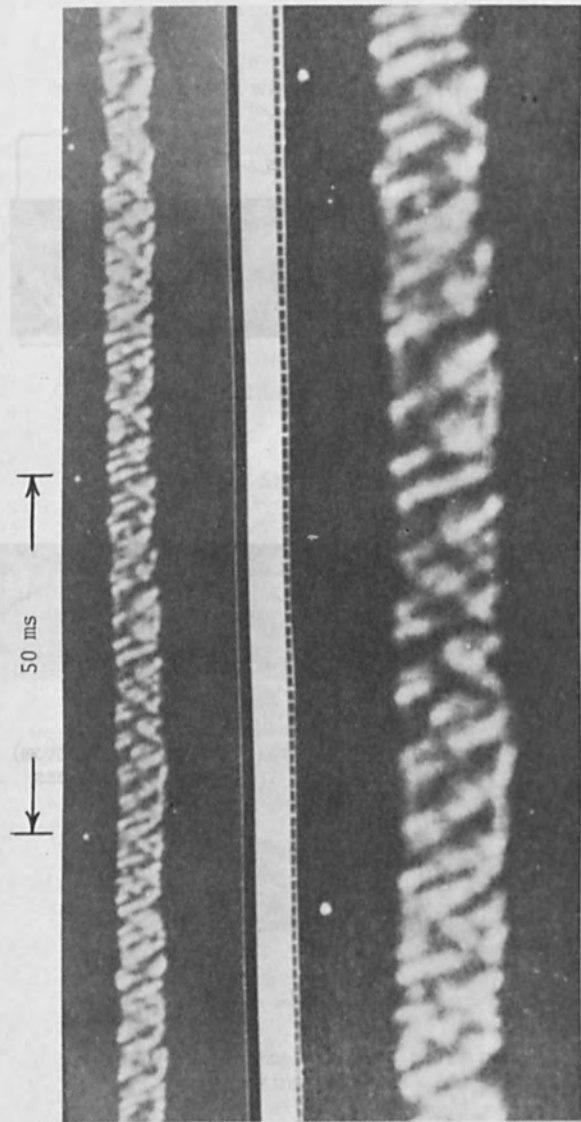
X-ray exposure and enlargement of a weld (122 kv, 10 ma, 21 ipm) on 7075 aluminum showing typical closure activity in the cavity. 4
